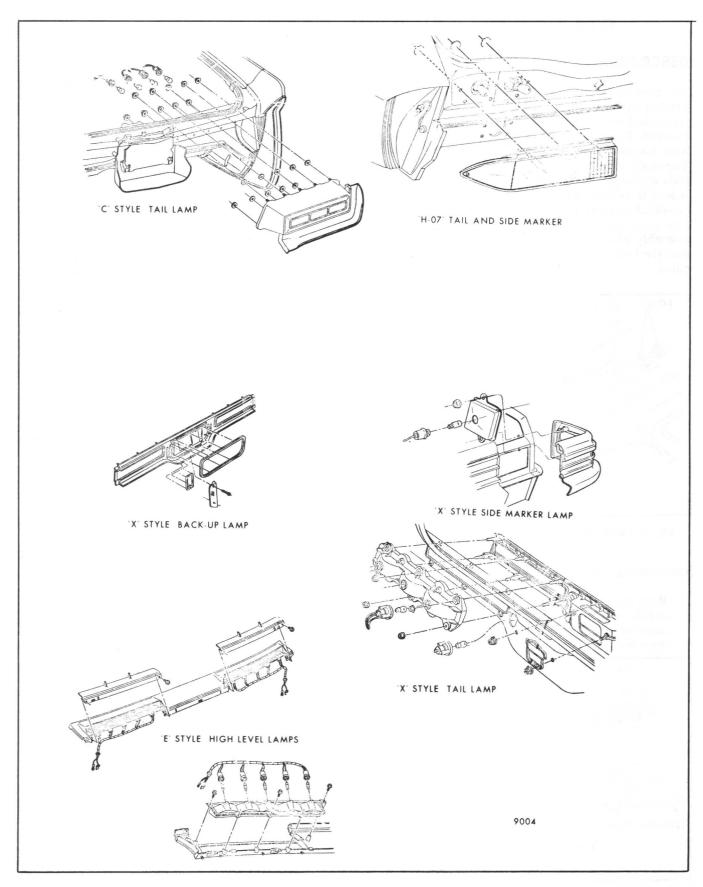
Exterior Lamp Installation - Buick Styles
